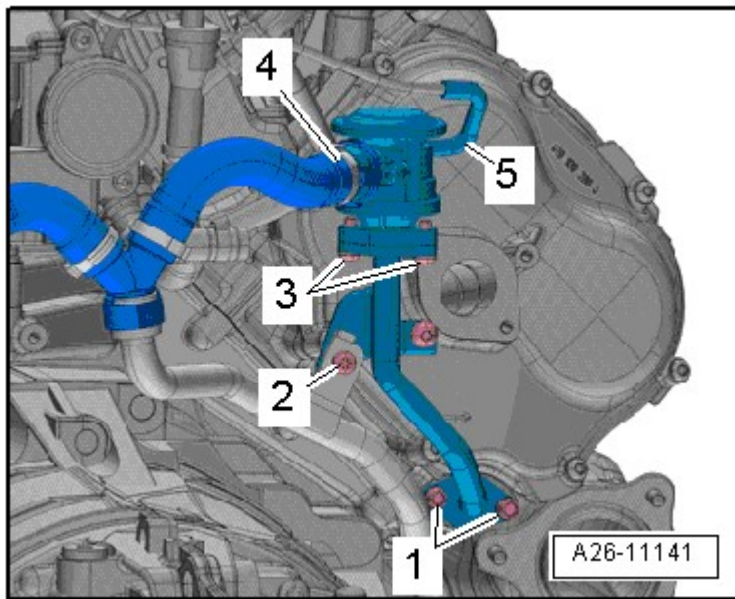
Identifying Right Secondary Air Injection (Air) Combination Valve
